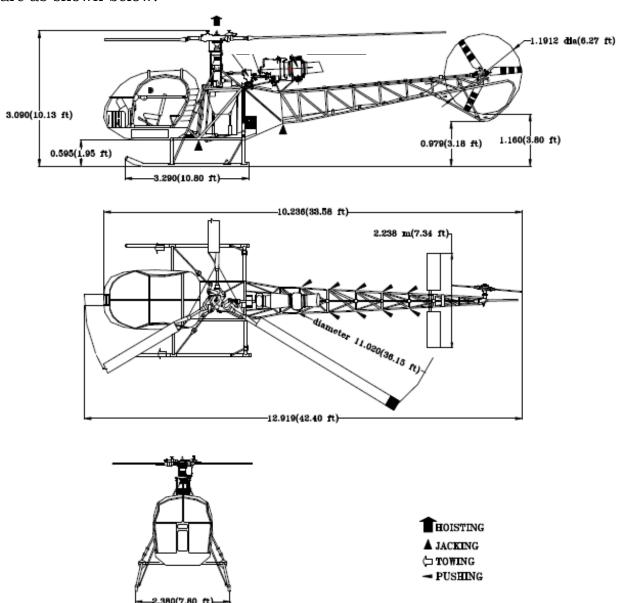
Dimensions of Cheetah/Cheetal Helicopter
